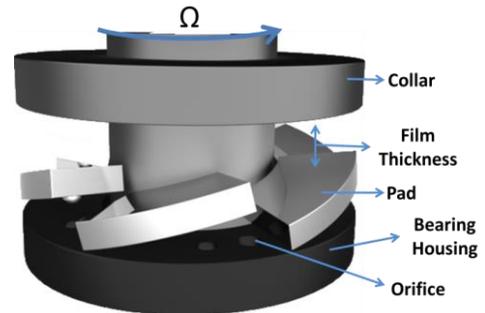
A schematic view of a 6-pad TPTB (exaggerated clearance)
